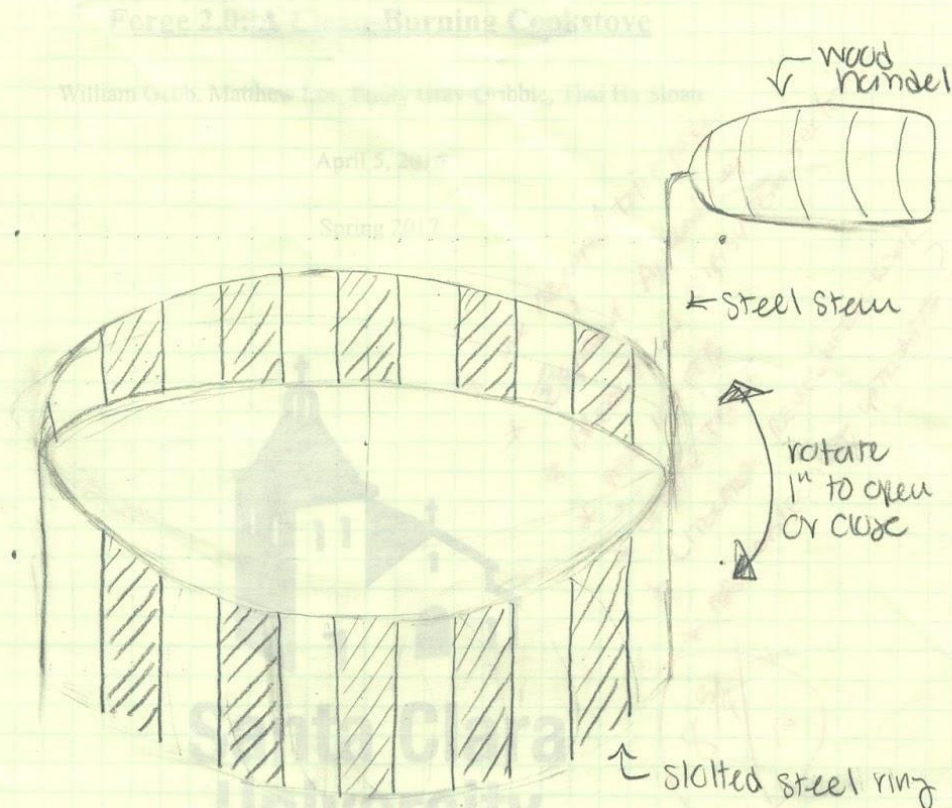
Forge 2.0 stove side view attributed drawing - Thai Ha Sloan.
